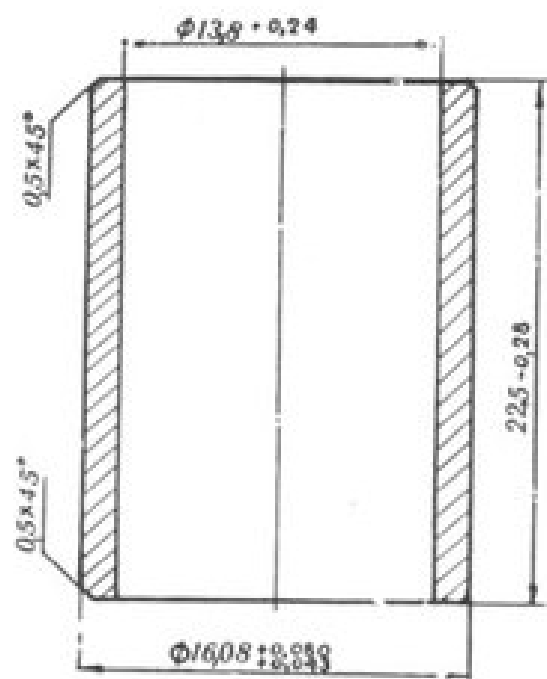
Connecting rod small end bush, ИЖ-10-3 motorcycle.
